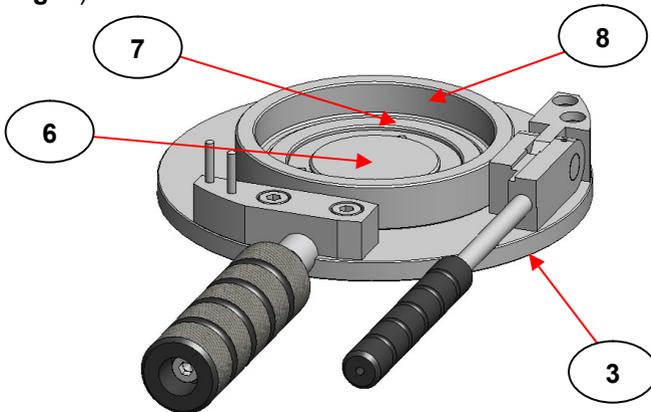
Guide Ring and Spacer Ring Fitted to Lower Platen Pressing Assembly
